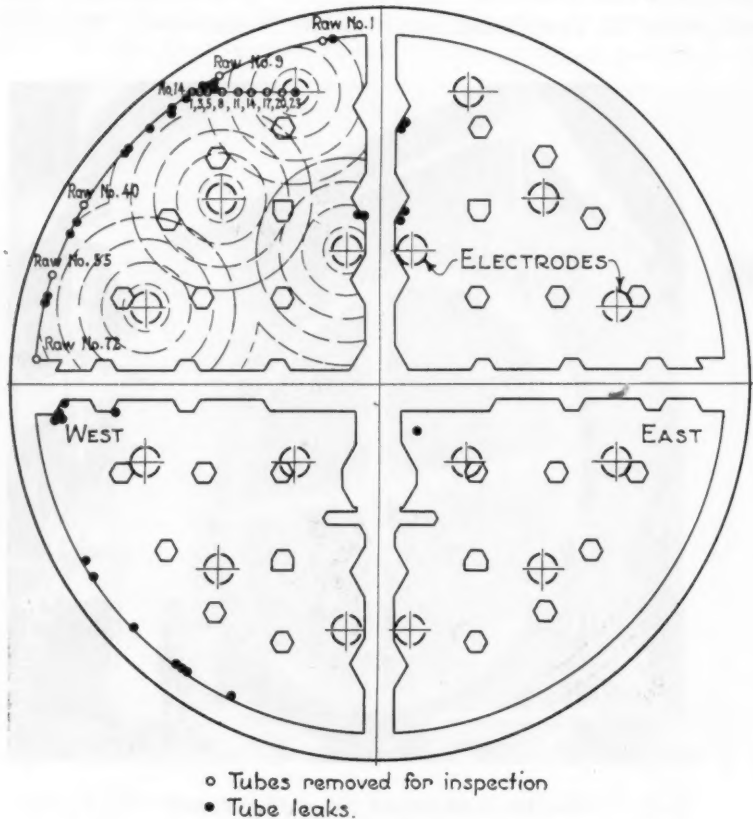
TUBE SHEET NO. 9 CONDENSER (LOCATION OF TUBE LEAKS AND ELECTRODES)
